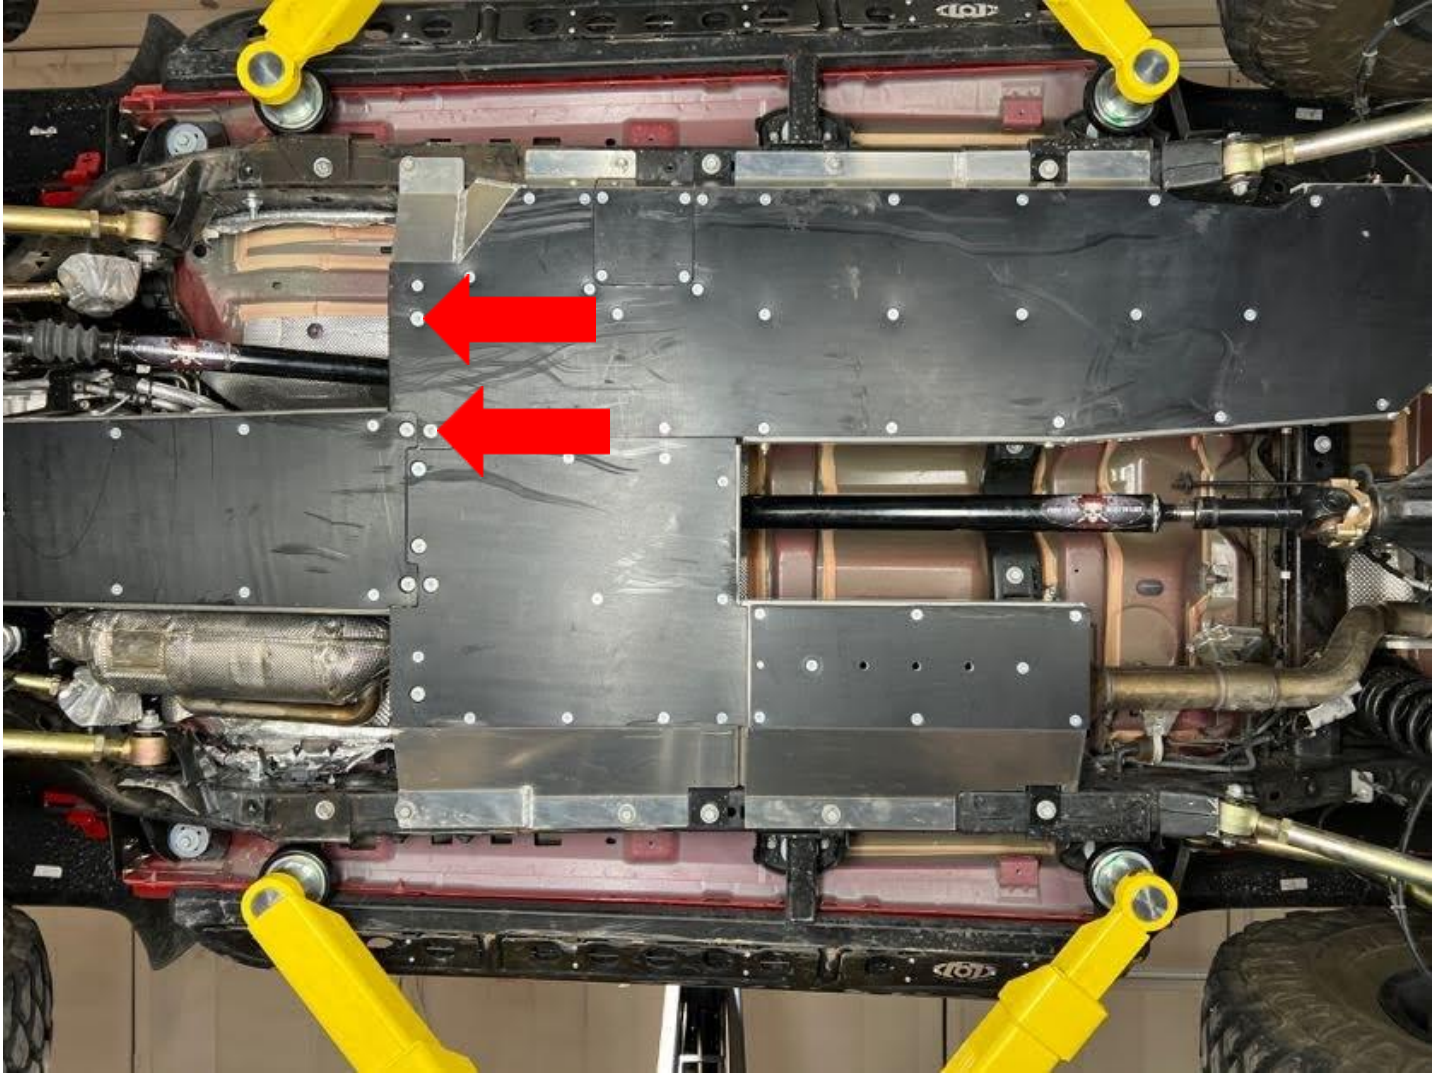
The access door to the fuel/water separator can be installed last, however it will utilize the provided  $\frac{3}{8}$ "-16x0.75" button head bolts (Figure 2 Item #3) as will the additional fuel tank skid mount called out with the red arrow.
